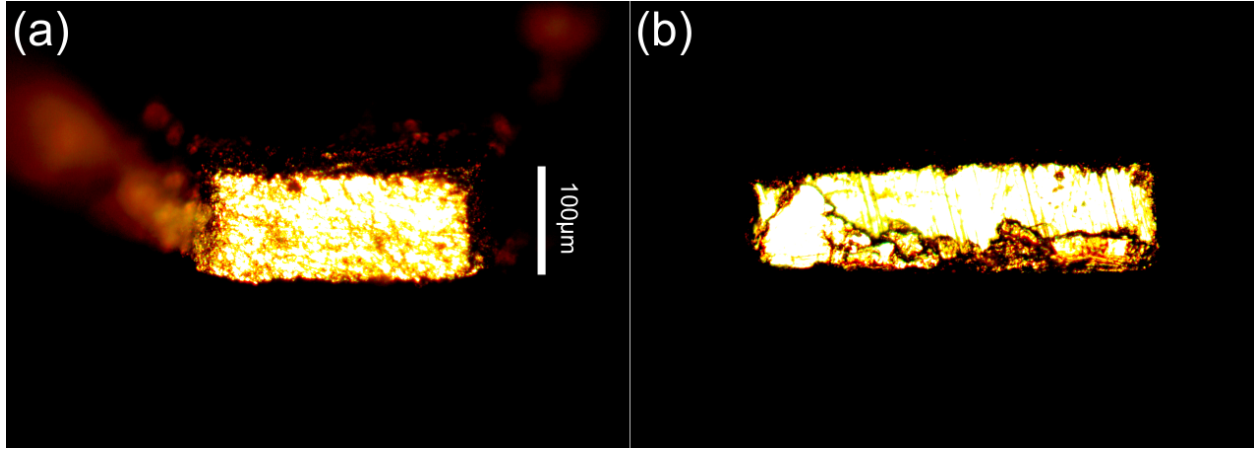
(a) Flat tip surface that is lapped after initial machining. (b) Finish with a milling machining.
